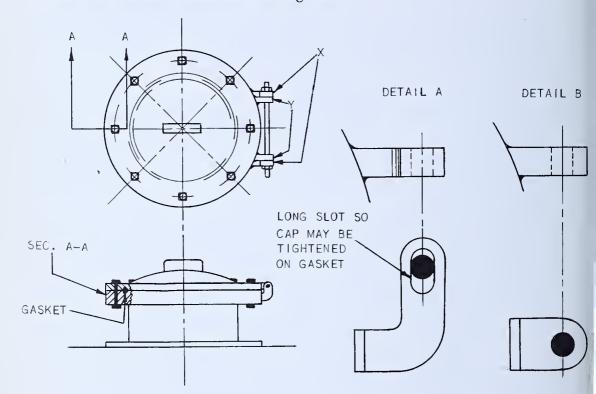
Manhole Cover Hinged to a Vertical Tank
